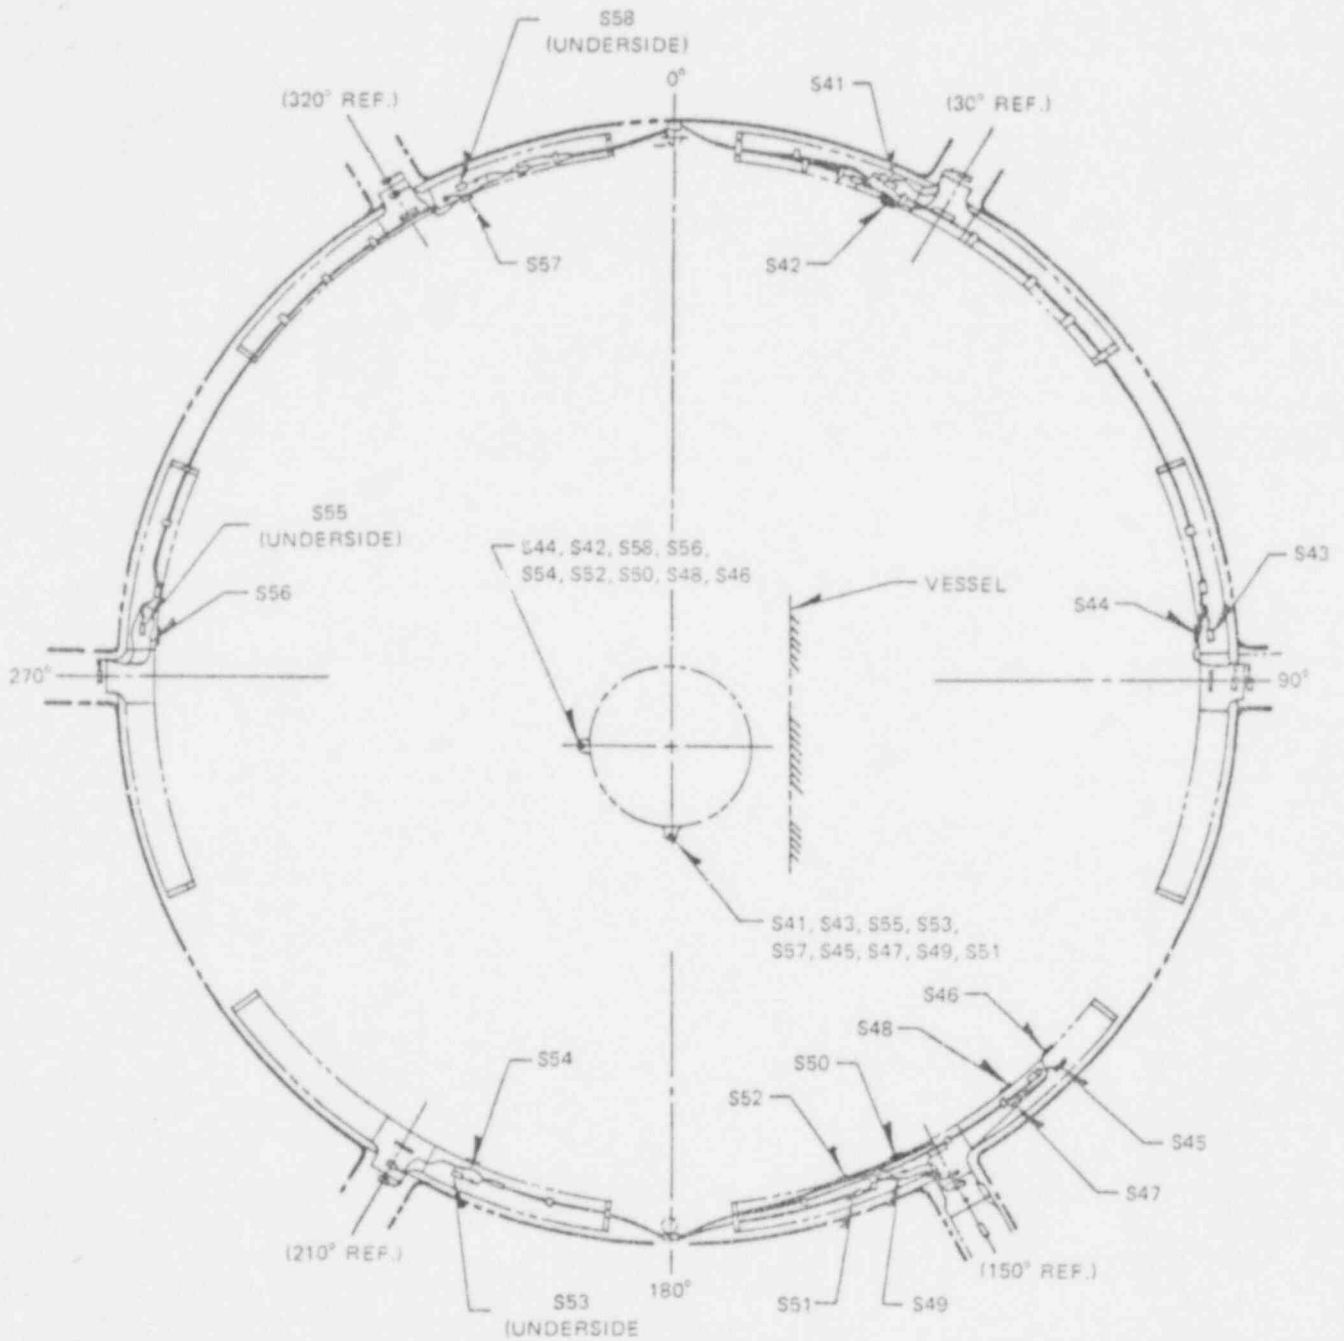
Strain Gage Locations on Jet Pump Riser Braces
